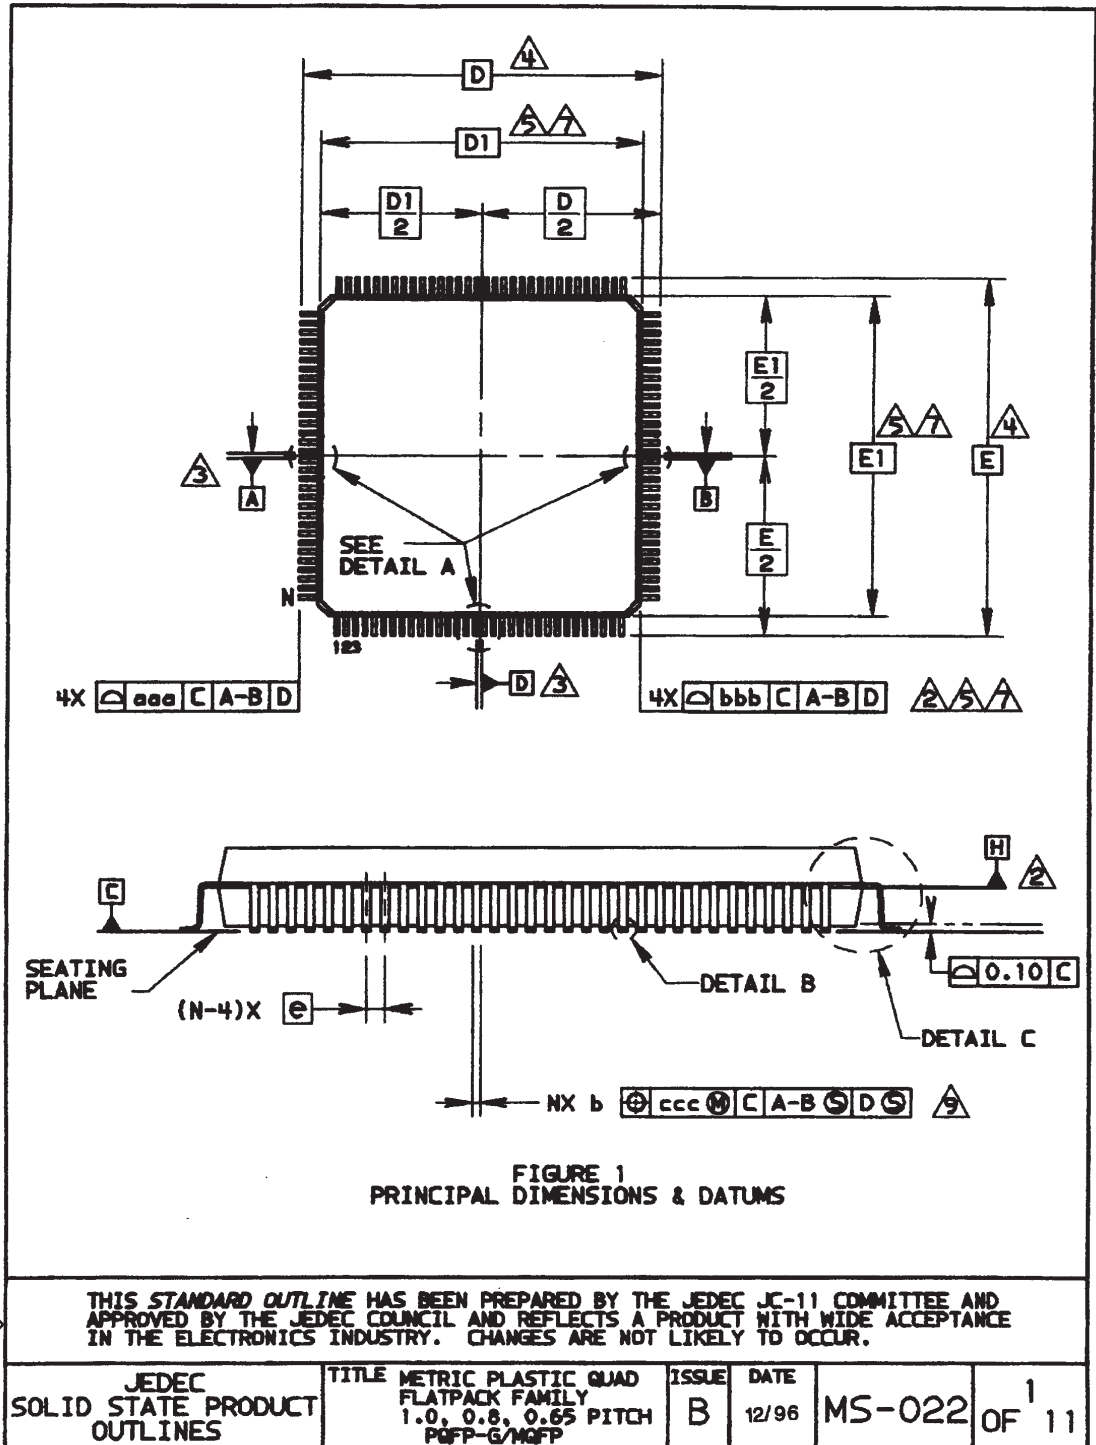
Example of a Standard-Outline Drawing Top Sheet
